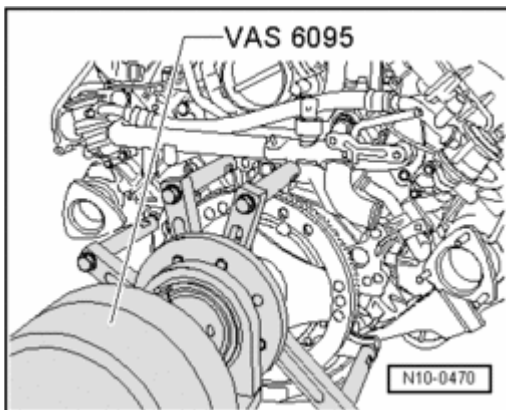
Lifting Engine By Shop Crane VAS 6100 Far Enough So That Flywheel Center Is At Height Of Mounting Plate Of Engine And Transmission Holder VAS 6095
